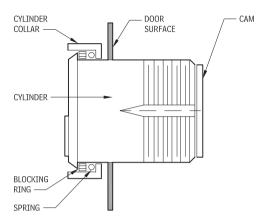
Cylinder Collar (Source: Courtesy of SARGENT® Manufacturing Company)
